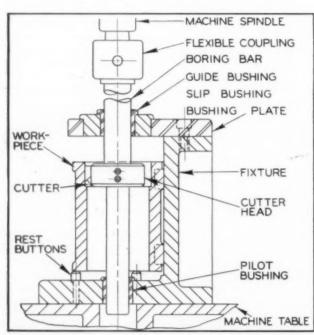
Suggested design of fixture for accurate boring on a machine—such as a drill press—having a loose spindle. The workpiece used for purpose of illustration is an open-end cylinder provided with mounting feet. Clamping is not shown, being incidental to the theme. The cutting tool is held in a cutter head, which is pressed on the bar and shouldered above the cutter head to take thrust. The bar is piloted both ends, with a flexible coupling interposed between the bar and the spindle; thus, the bar has practically perfect alignment regardless of spindle play. Note that the upper guide bushing is held in a slip bushing of larger diameter than the bore of the workpiece so as to permit passage of the cutter head. As the bar is retracted the cutter head lifts up the slip bushing, the whole thereby clearing the fixture for unloading and loading.
